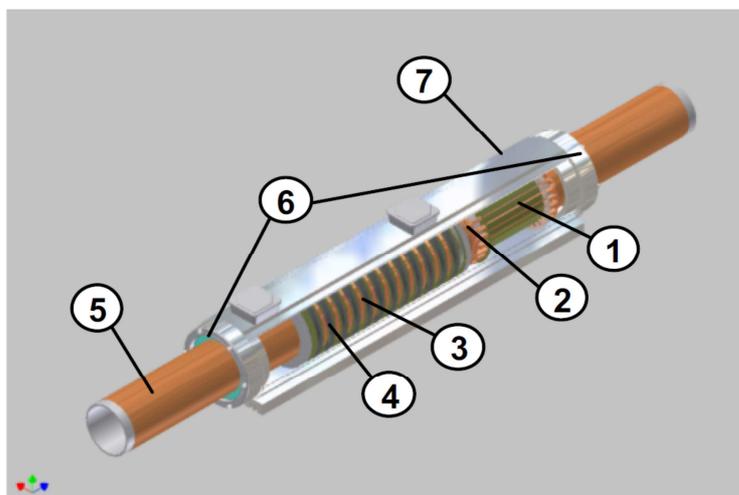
Construction of linear – rotary induction motor: 1 – yoke of stator of rotary module, 2 – winding of rotary module, 3 – yoke of stator of linear module, 4 – winding of linear module, 5 – tubular rotor with conducting copper layer, 6 – bearings system, 7 – casing
